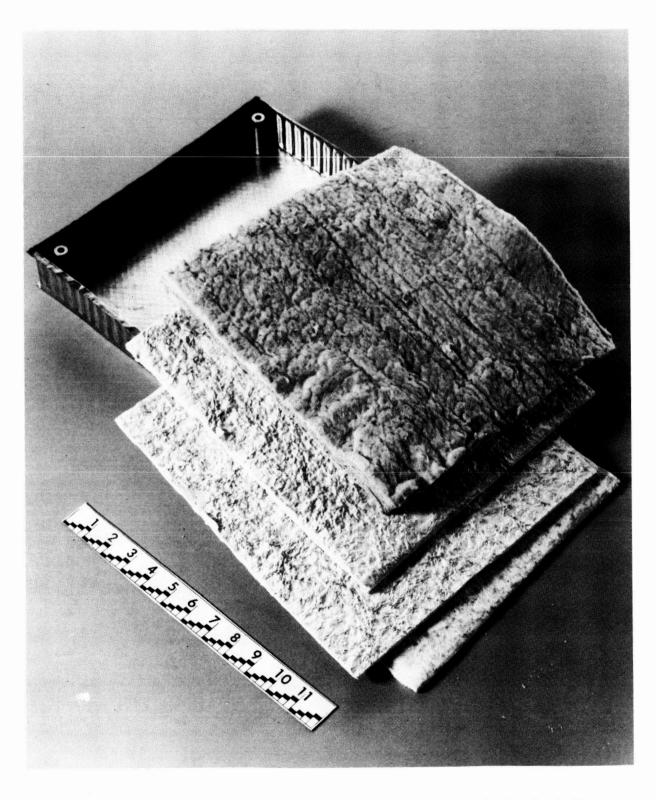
Pre-cut Q-Fiber Felt and DYNAFLEX Ready to be Installed into the INCONEL 617 Subassembly
